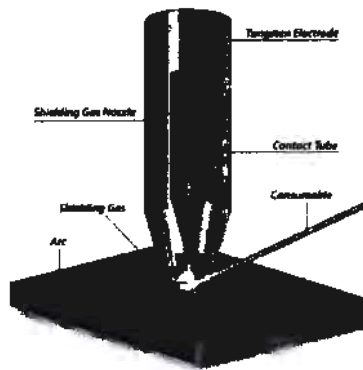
Shielding Effect during TIG Welding
